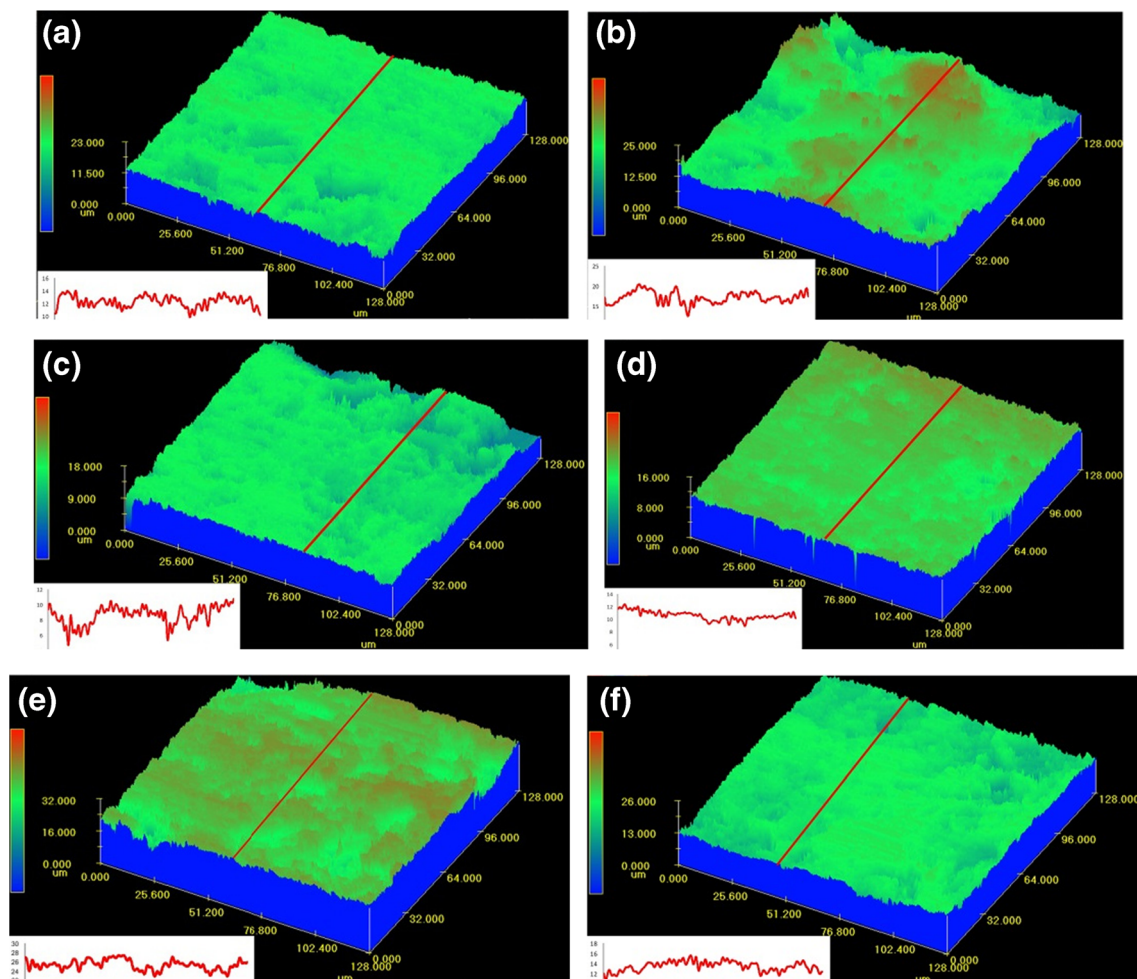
3D texture models of the machined surface in different grit size and grinding wheel polarity situations a grinding wheel “–,” grit size W40 b grinding wheel “+,” grit size W40 c grinding wheel “–,” grit size #120 d
